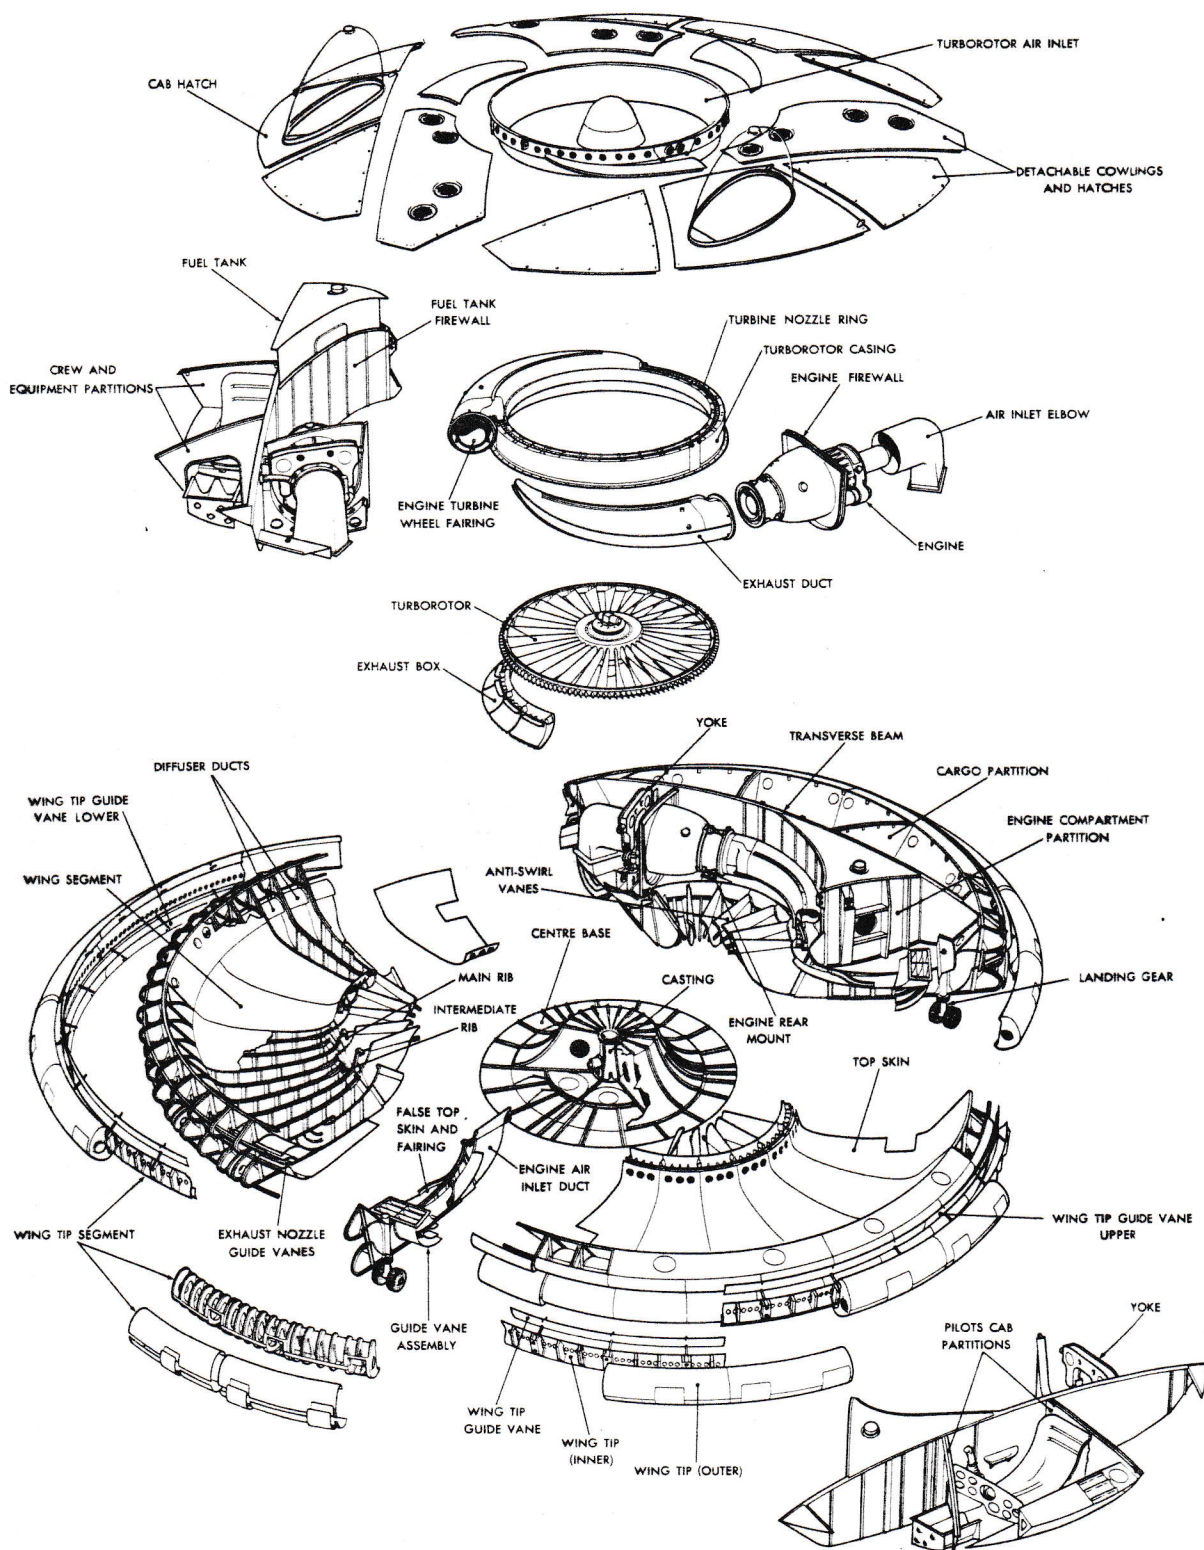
AIRFRAME STRUCTURE EXPLODED VIEW
